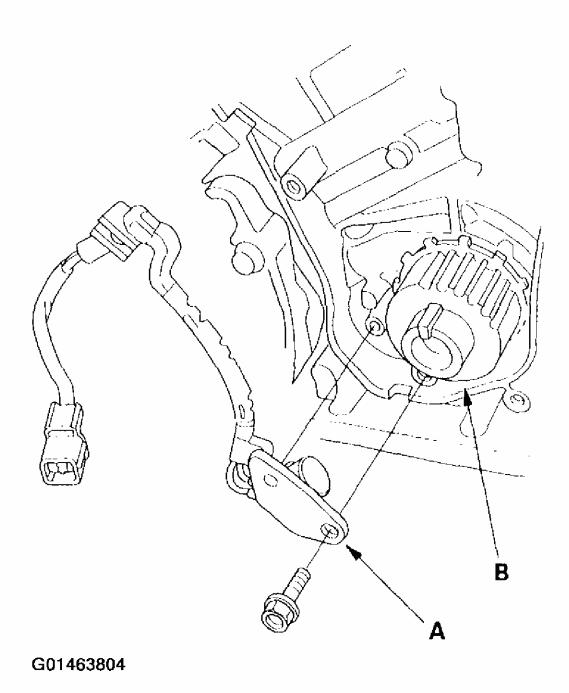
Removing The Crankshaft Position Sensor From The Oil Pump & Removing The Timing Belt Drive Pulley
